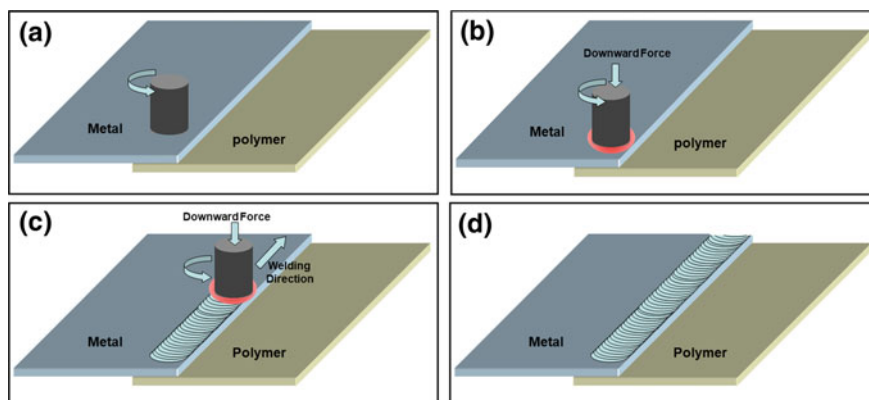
Schematic illustration of friction lap welding: a rotating tool prior to contact with the plate; b rotating tool presses against the plate while expanding the hot zone; c the rotating tool moves relative to the plates, creating local heating and high pressure at the interface between metal and polymer; and d the rotating tool moves away from the plates, producing a strong bonding between metal and polymer
